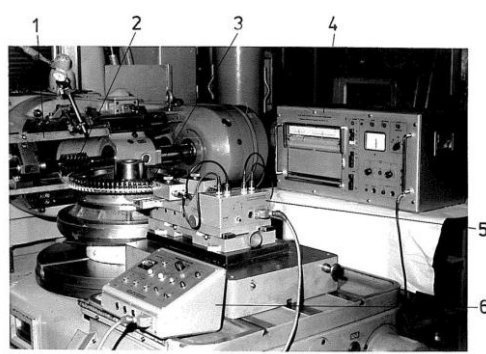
The worm hob and measurement device Dr.HÖFLER installed on a PHAUTER 900S machine tool.
